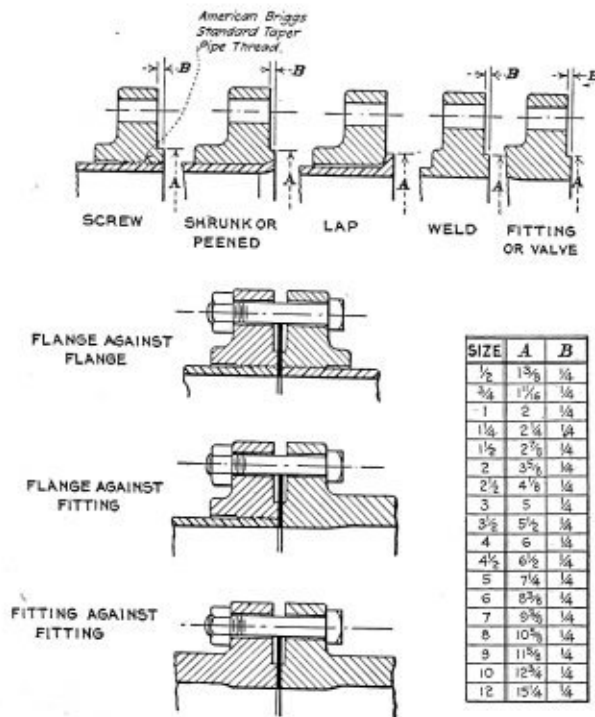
Flange Joints and Methods of Attaching Flanges to Pipe, 800-Pound and 1,200-Pound Hydraulic American Standard
